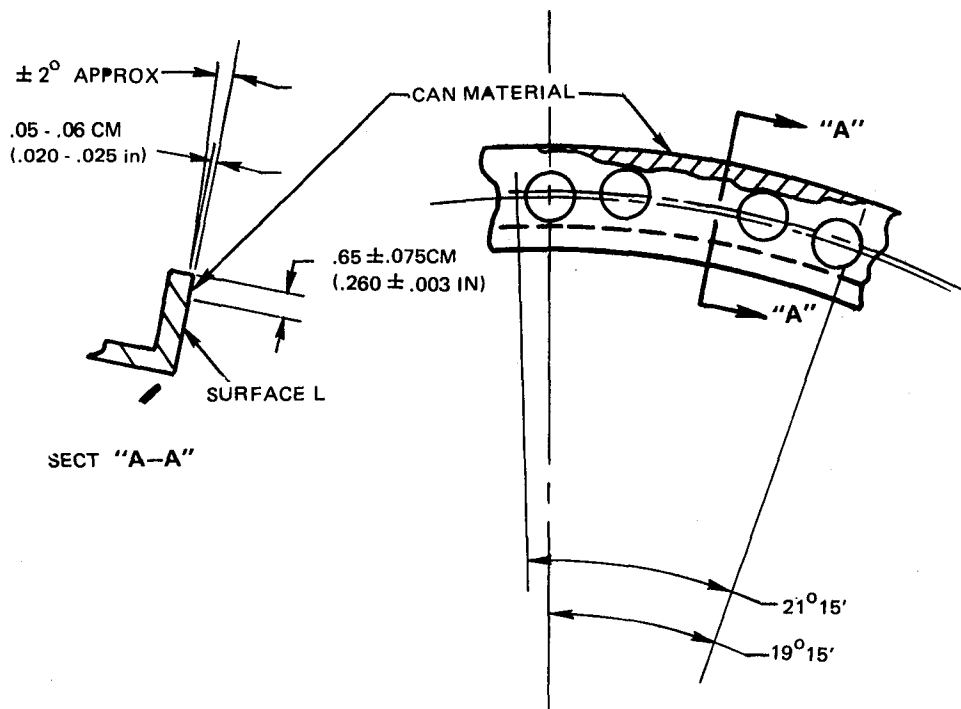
Bolt Flange-Face Modification of Disk 160-3
